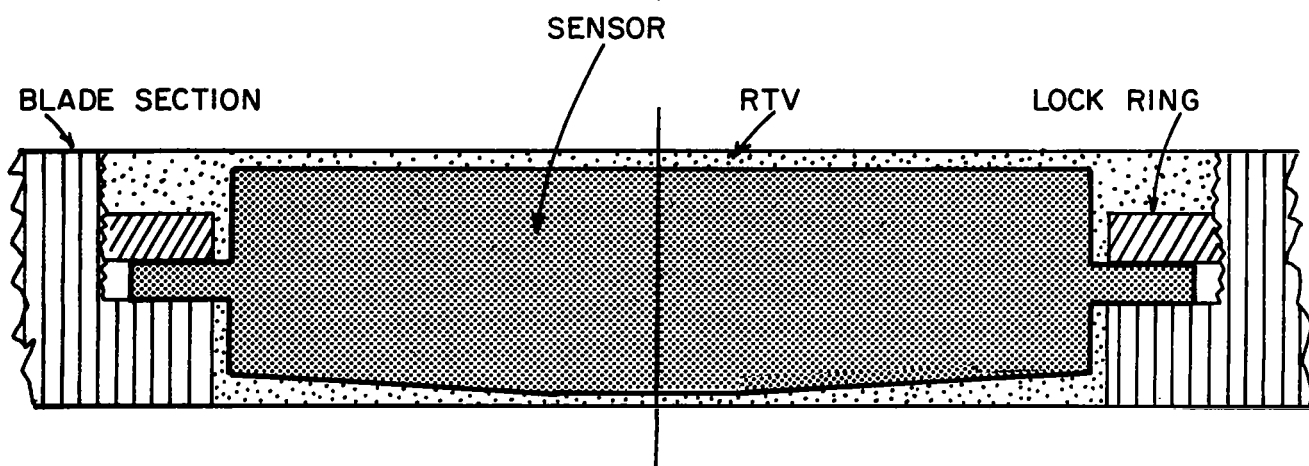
MOUNTING OF DIFFERENTIAL-PRESSURE SENSOR IN BLADE
